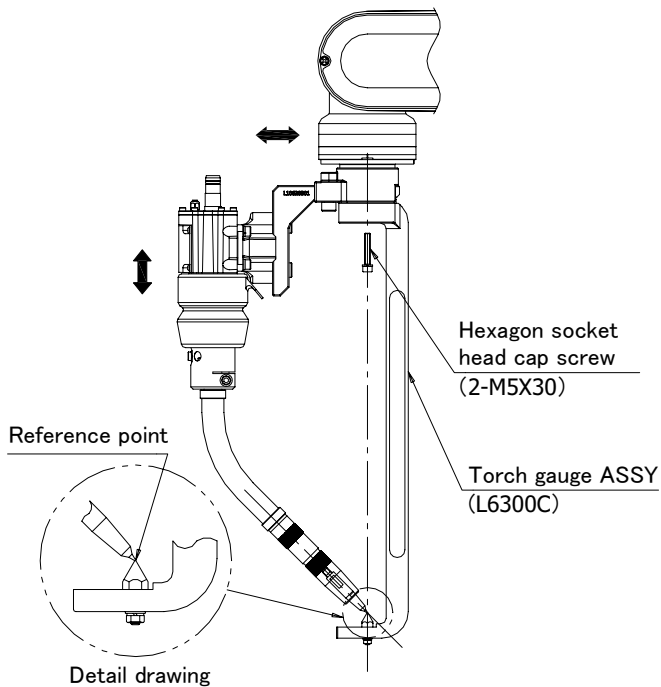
Mounting the torch gauge (for 45° curved torch)
